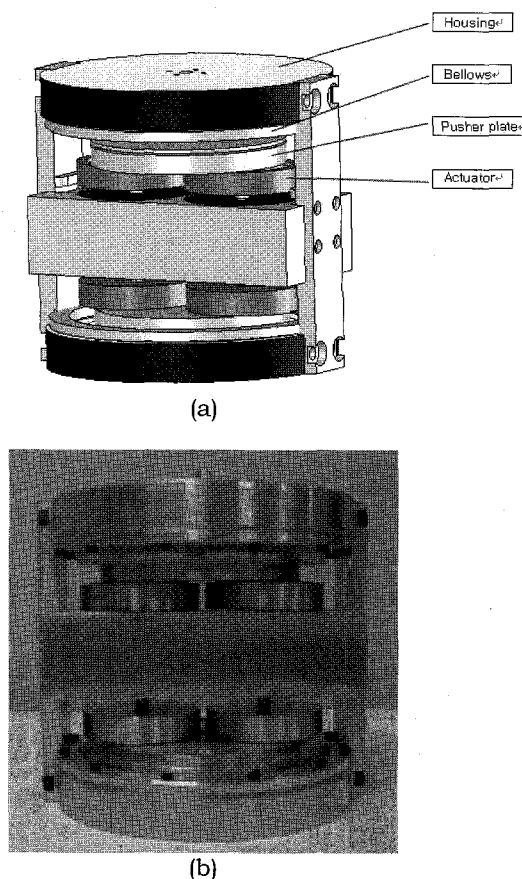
Exterior view of the prototype pump unit using the electromagnetic actuator. The whole system comprises of two of each pump housing, bellows, pusher plate and actuator. (a) Schematic diagram of the pump unit. (b) Photograph of the pump unit.
